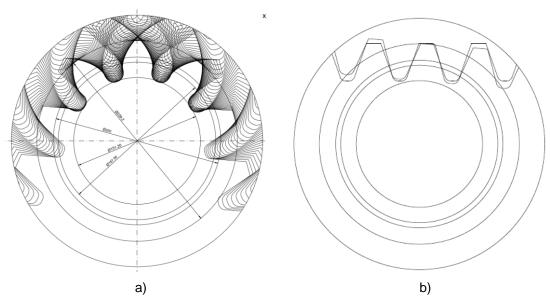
Part of the gear model drawn in AutoCAD, simulating MAAG method of gear shaping
